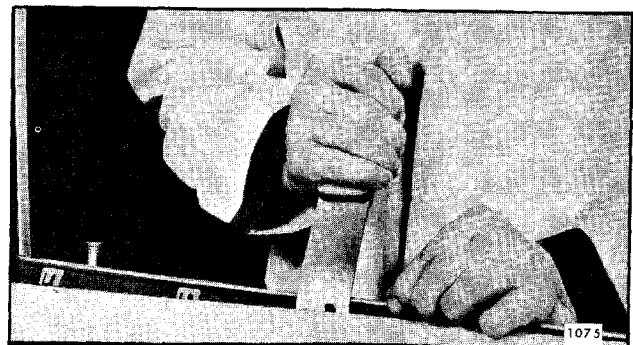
Glass Run Channel Inner - Outer Strip Assembly Removal - "A-X & Z" Styles
